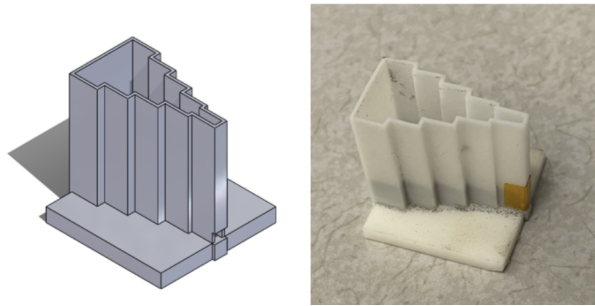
X-ray path length test jig design (left) and test jig partially filled with tungsten powder (right).
